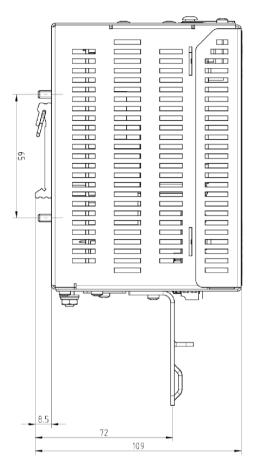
Dimension drawing IE Switch X302-7EEC - side view
